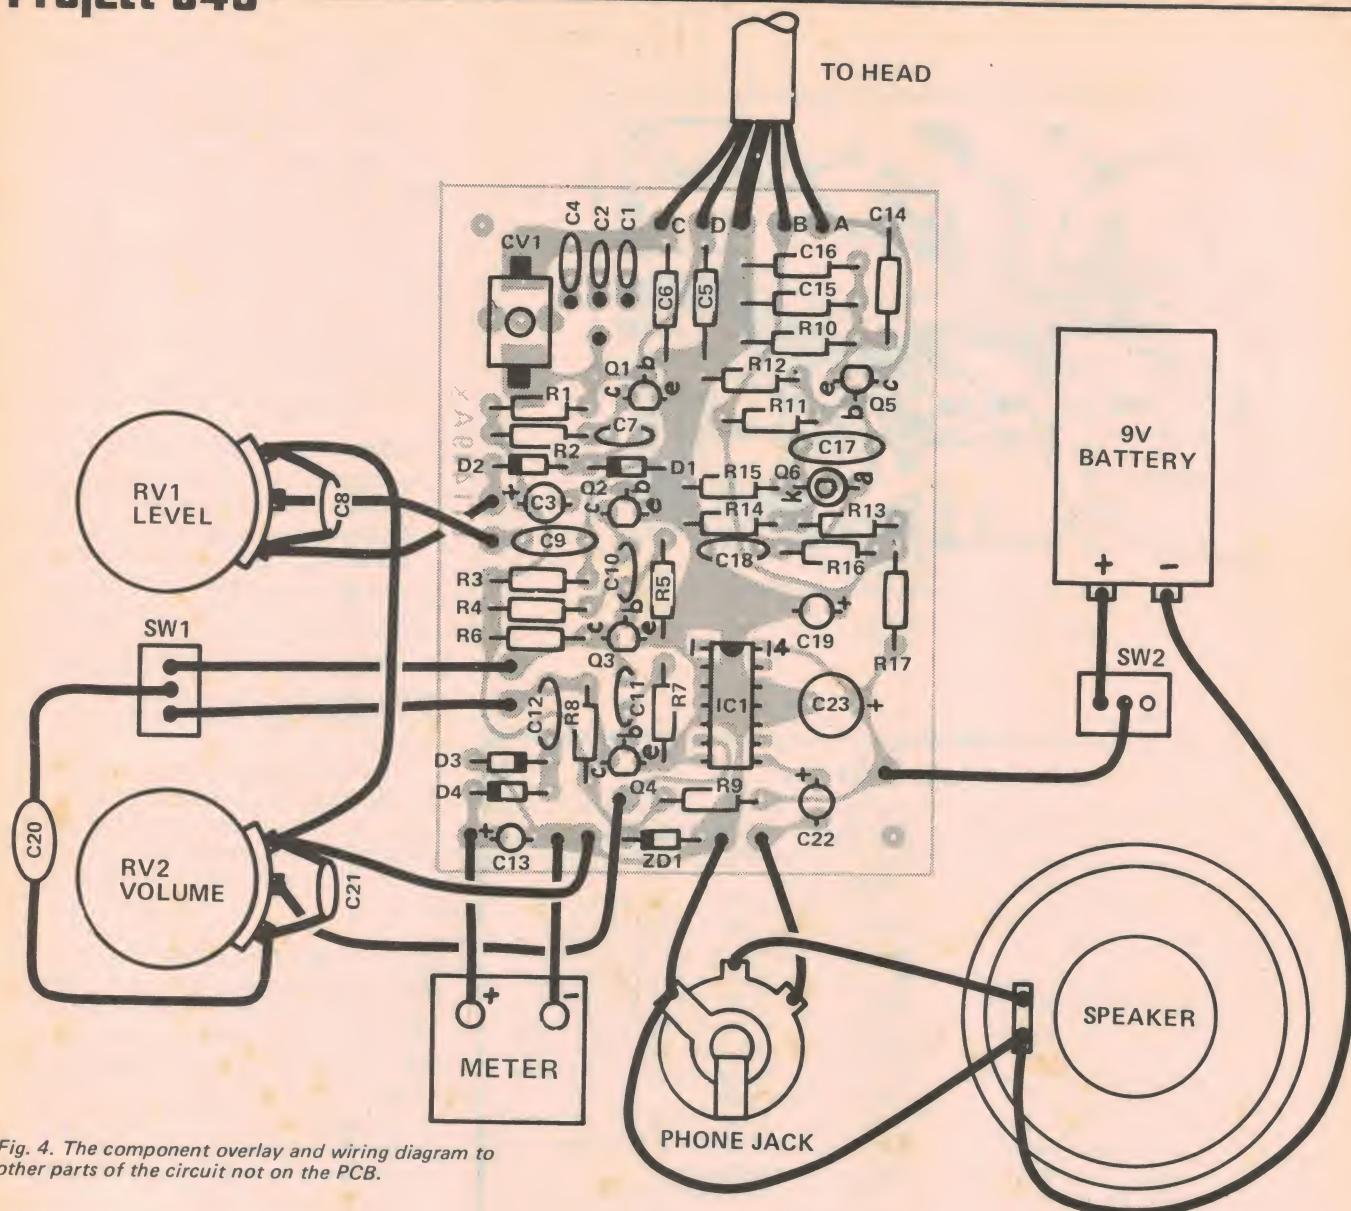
The component overlay and wiring diagram to other parts of the circuit not on the PCB.
